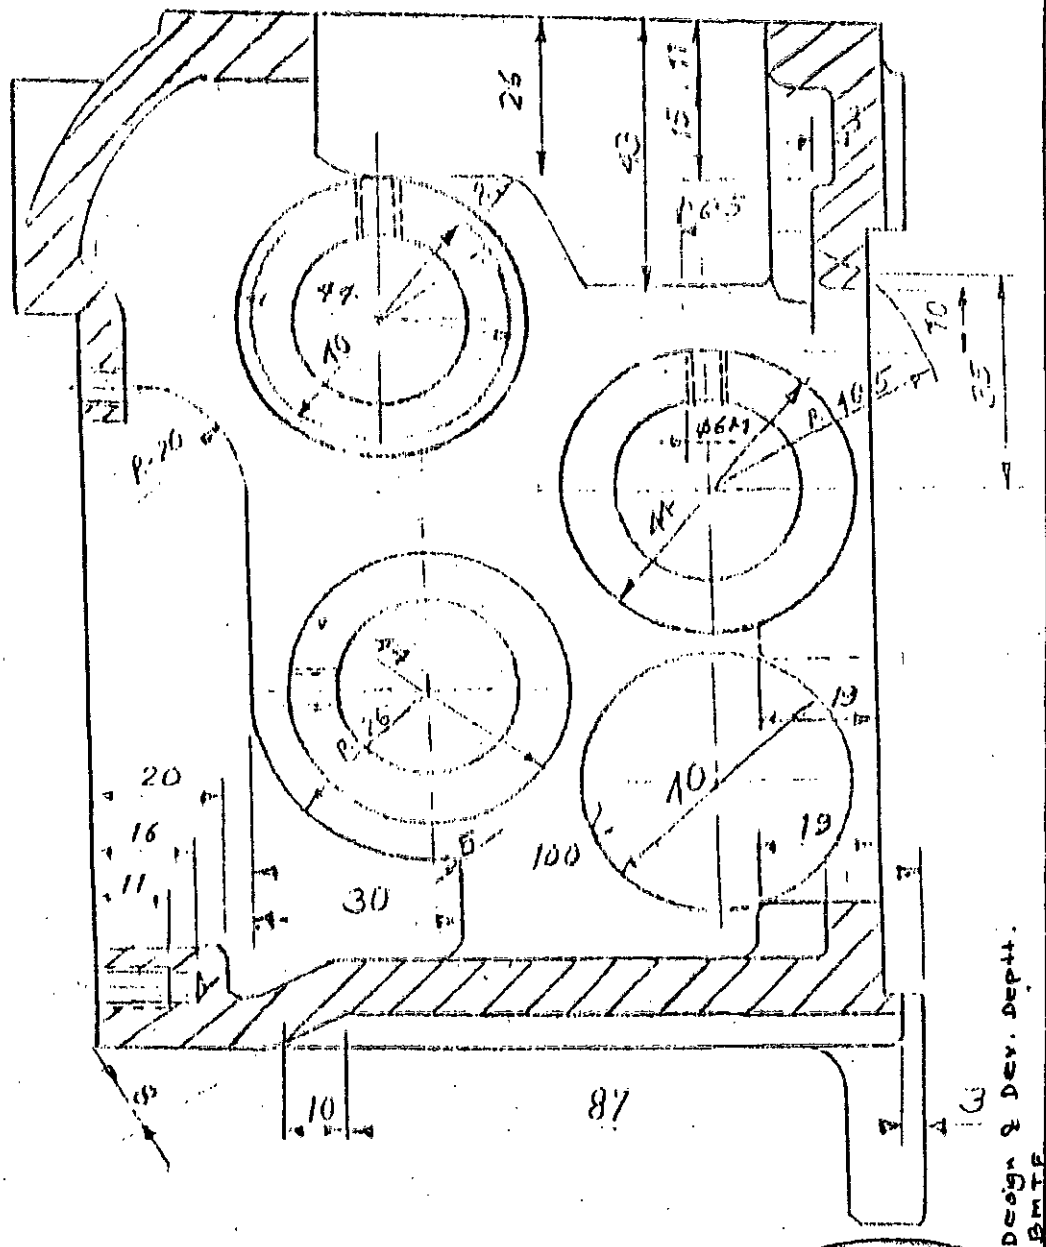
SECTIONAL VIEW (EF) OF FEED GEAR BOX
